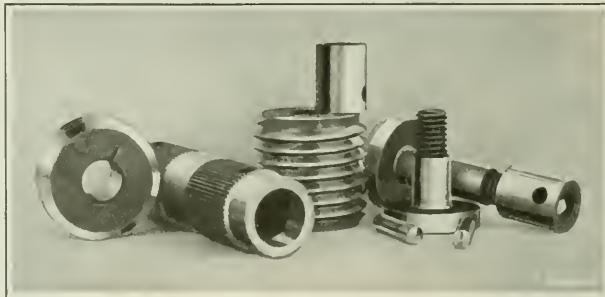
Parts of the Hartford Tap & Gauge Co.'s Thread Plug Gage
